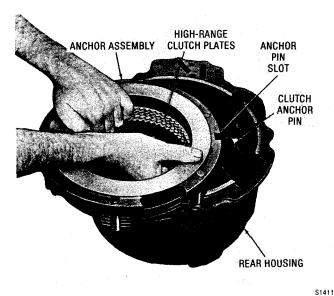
Installing high-range clutch anchor and plates (TRT-1)
